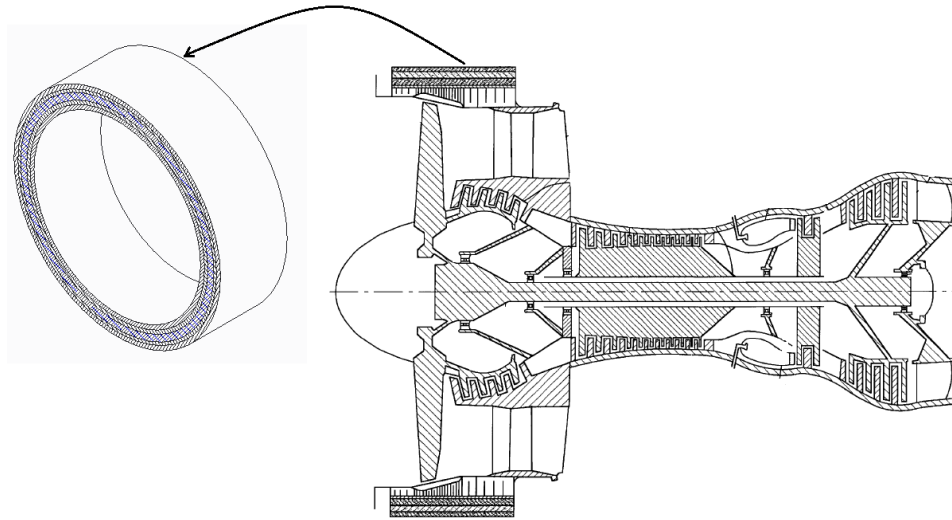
Illustration of fan blade containment casing of aero engine [2]
